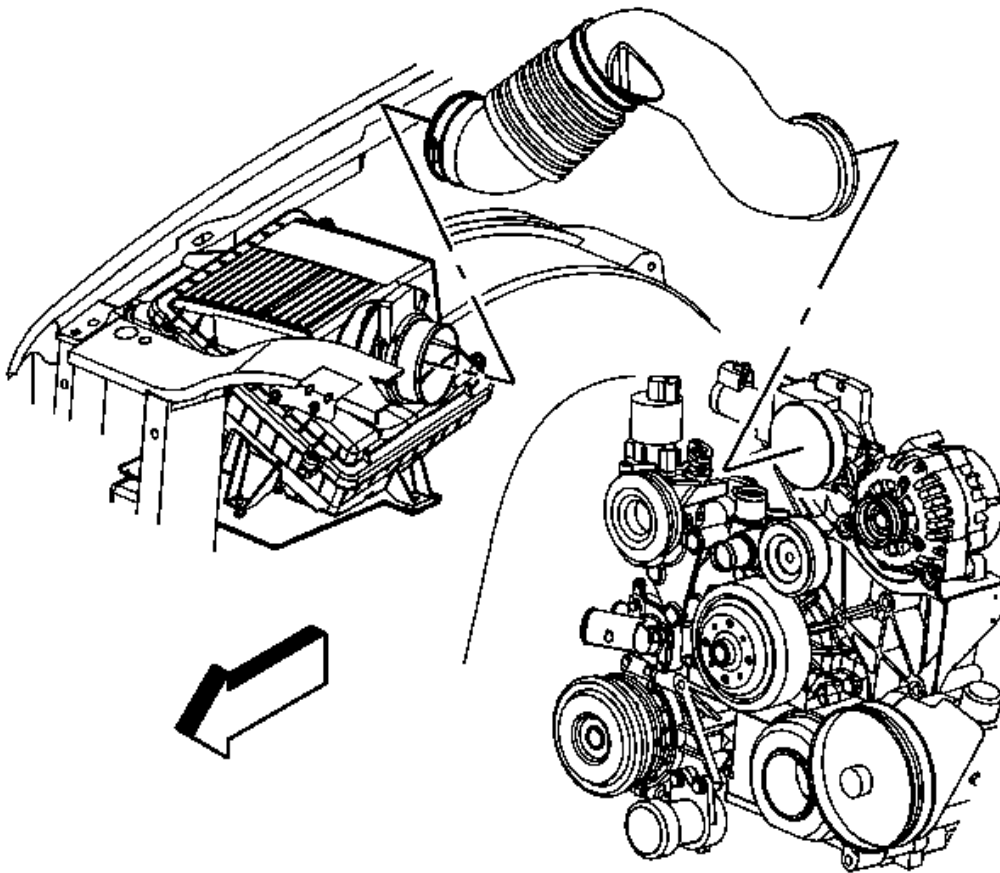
View Of Air Cleaner Outlet Duct (W/HP2 Front)
